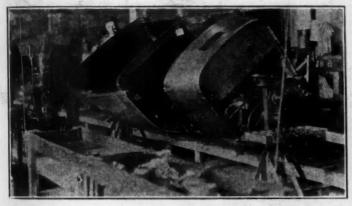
Revolving Body-Paneling Fixture on Wheels Internal Finger-Clamps Operated by Screw-Shafts Running Crosswise Have Replaced C-Clamps or Bolts on These Fixtures
